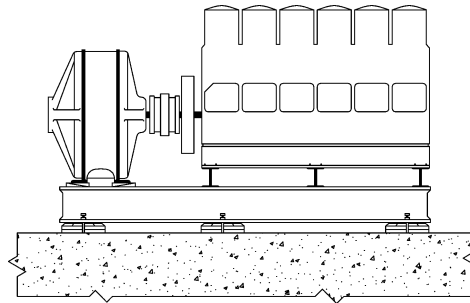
C.14 Supporting spring type of vibro-isolation of a six-cylinder diesel engine with generator on the shaft.
